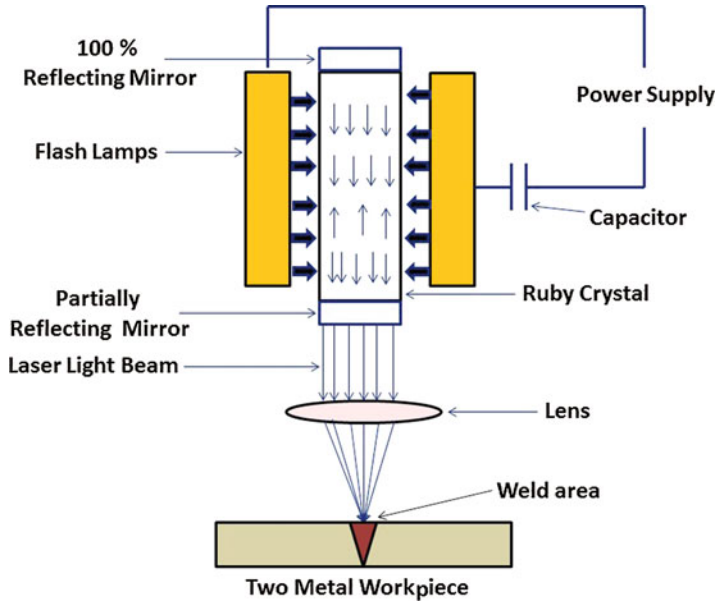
Laser Beam Welding Equipment. (Courtesy of theweldingmaster.com)
